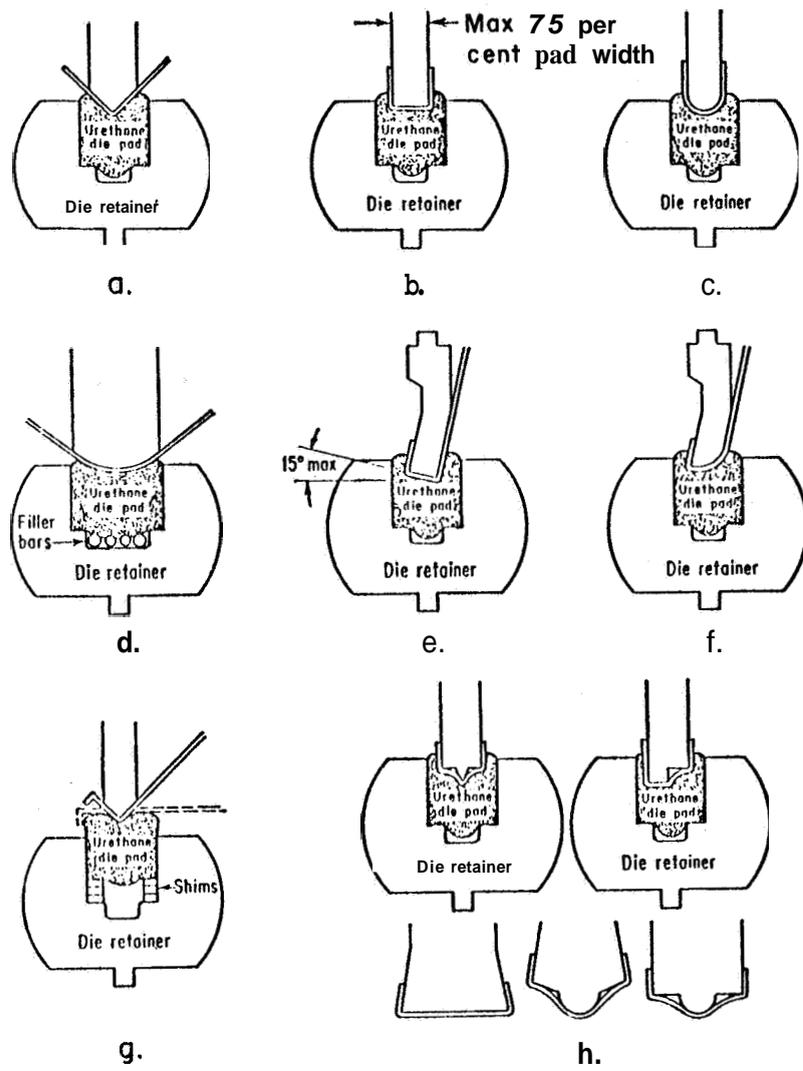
PRESS-BRAKE DIES USING URETHANE AS THE LOWER DIE (Ref. 70)
